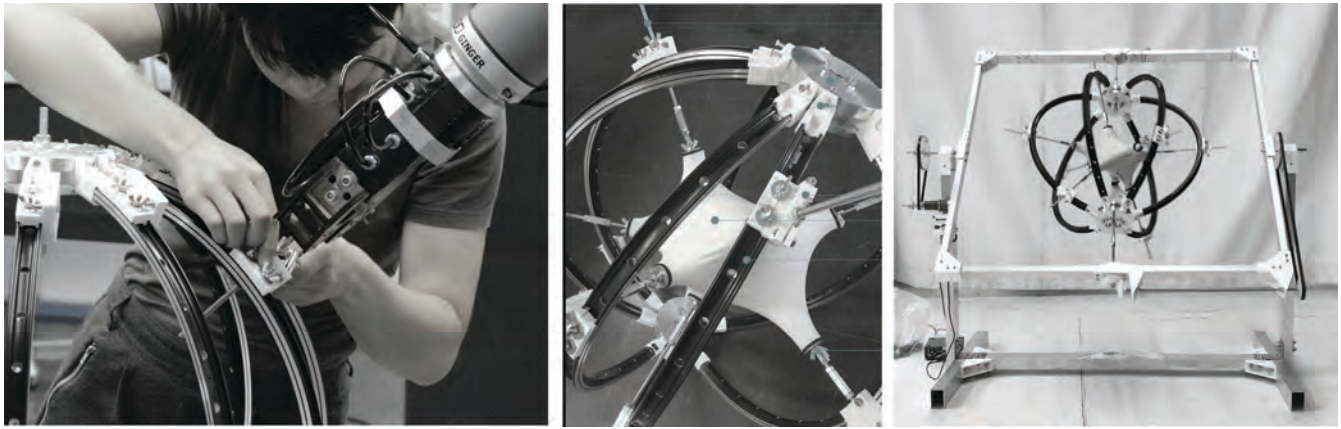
The digital-physical robotic-aided process. From left to right: Robotic placement of rods on spherical scaffold, Prestressed membrane formwork. Rotoforming machine.
